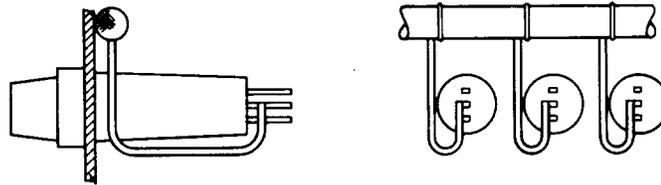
Contactors — KS-5323-01 and Similar Types — Wiring of Front-mounted and Connected, Rear-wired Potential Coils — No. 14 Gauge and Smaller Wires
